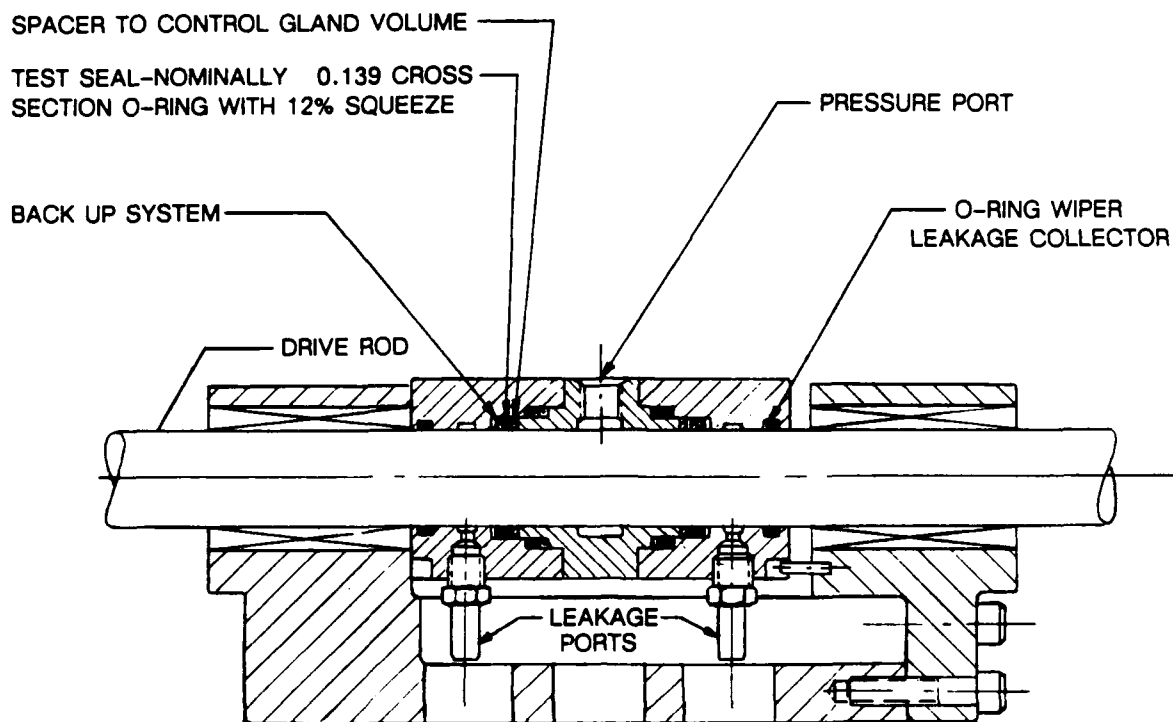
ONE-INCH, VARIABLE STROKE ROD TEST FIXTURE
